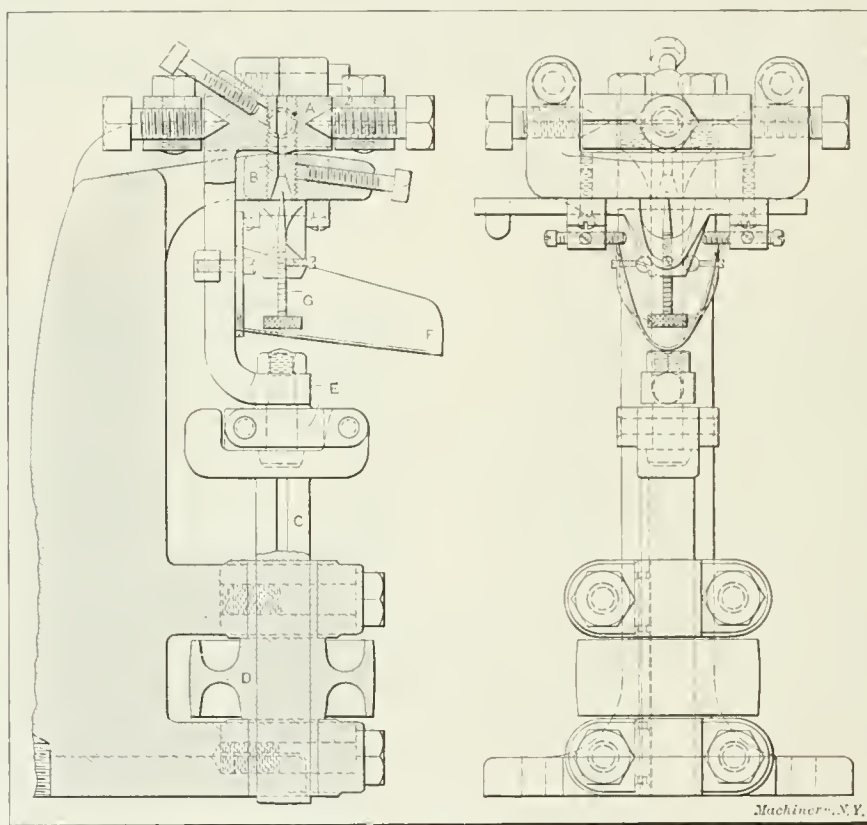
Construction of Pinion Shaft Threading and Cutting-off Machine
